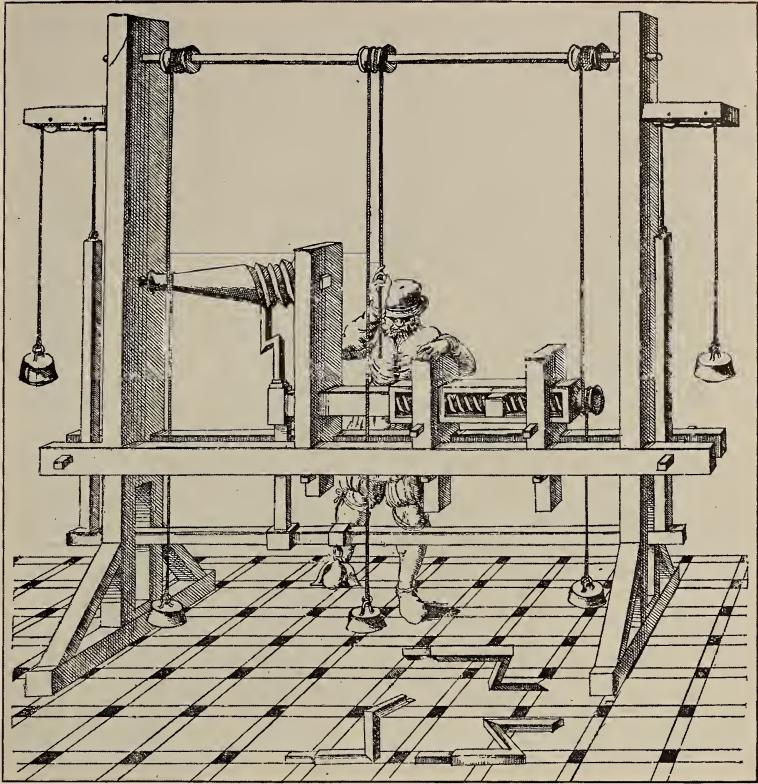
A SCREW-CUTTING LATHE OF THE SIXTEENTH CENTURY
